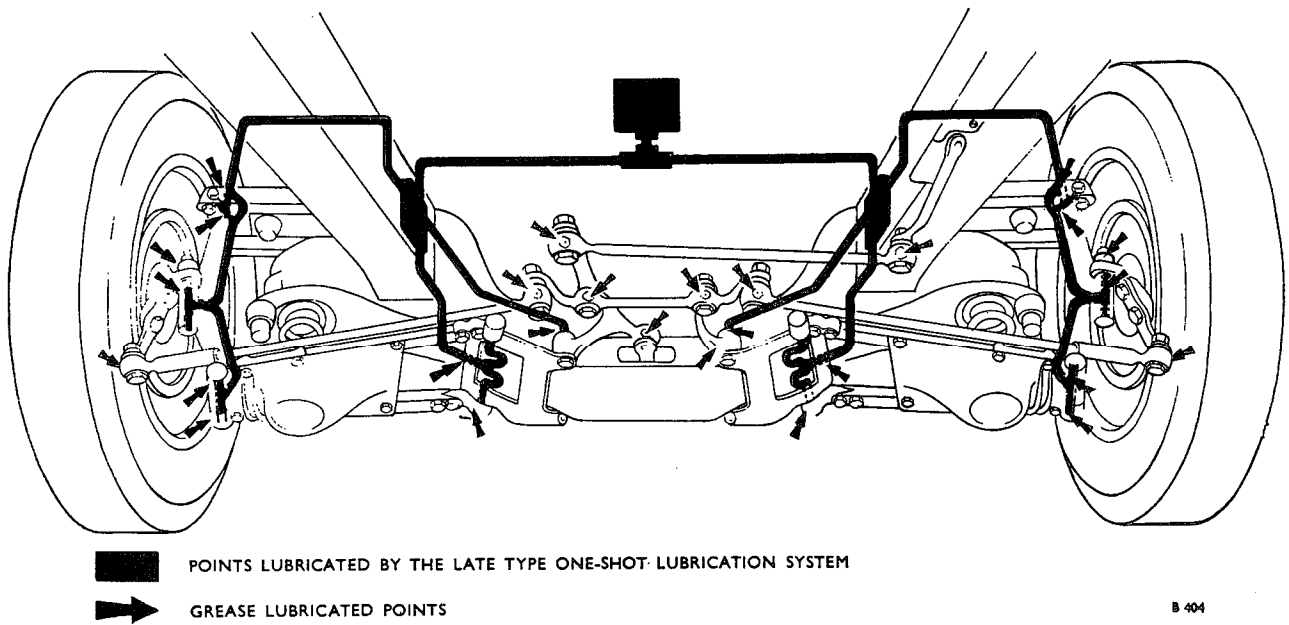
Late type one-shot oil lubrication system and grease lubricated steering joints
